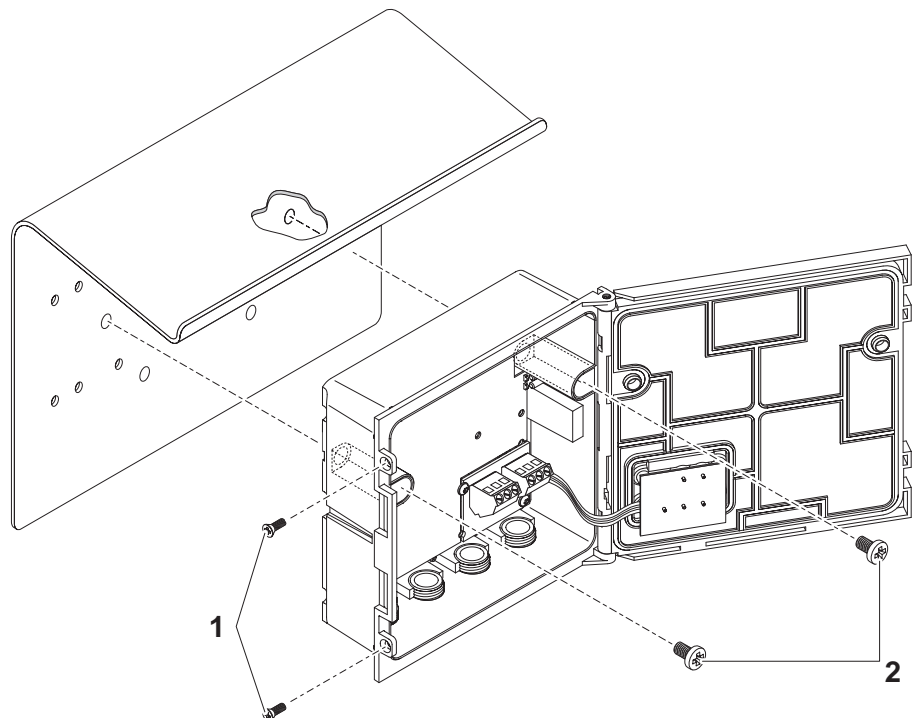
Mounting the module on the SD/K 170 sun shield
